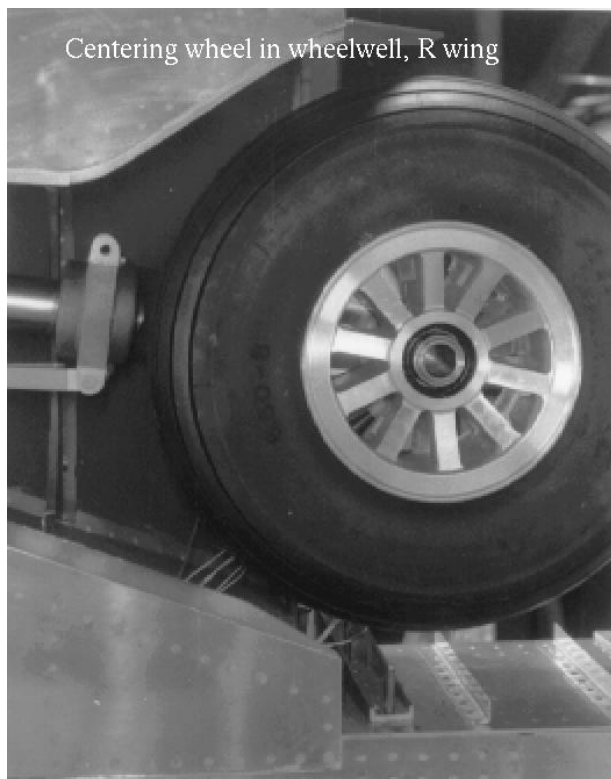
This is what the wheel should look like with the trunion completely seated in the front bearing.
